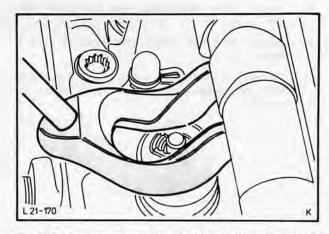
Remove valve spring using Special Tools 21–005–A and 21–006–A
